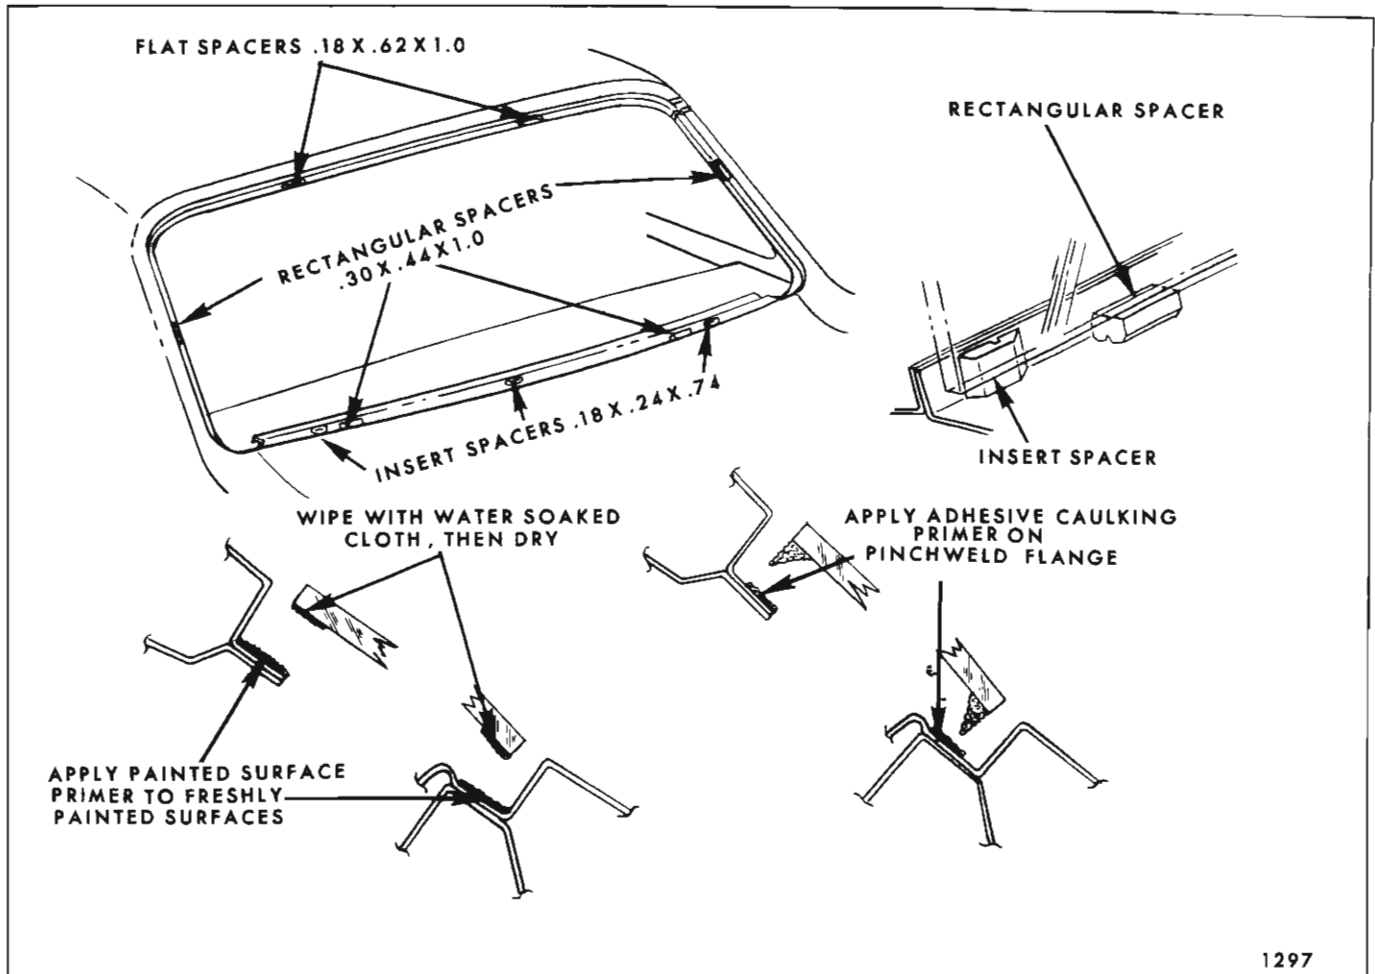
F3—Adhesive Caulked Back Window Spacer Installation
